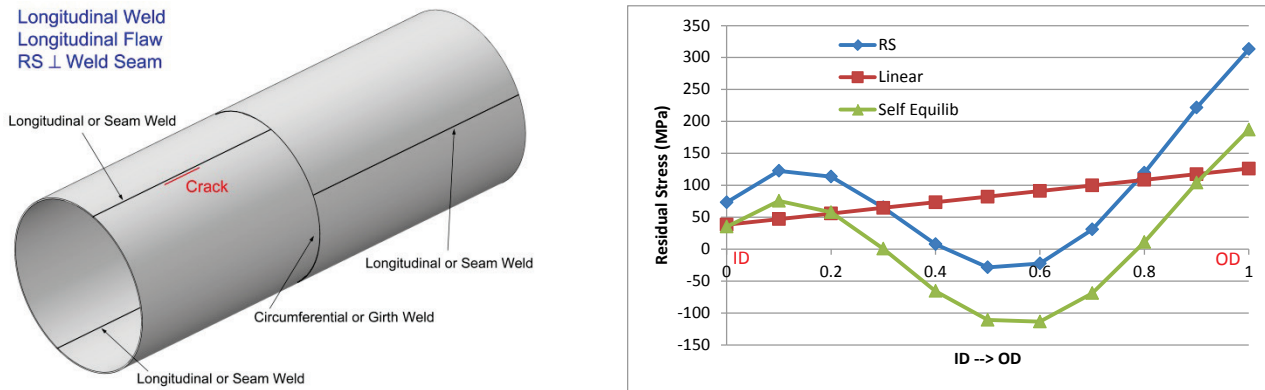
Case 1: Axial Crack Parallel to an Axial Weld - Residual Stress (RS) Perpendicular to the Axial Weld with a Double-V Notch
